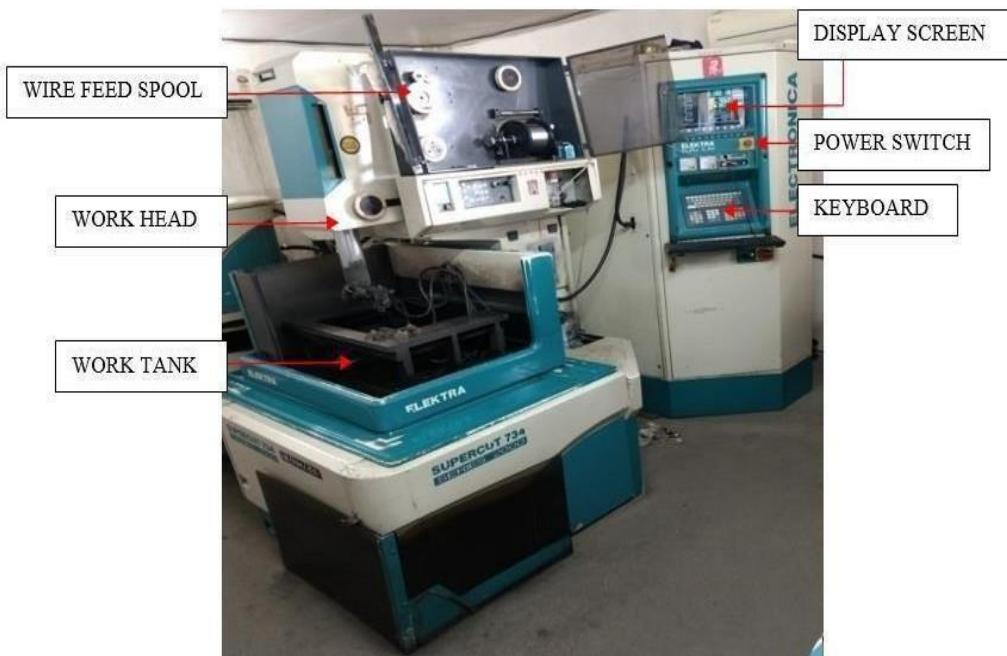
Pictorial View of Macro-WEDM Machine Tool.
